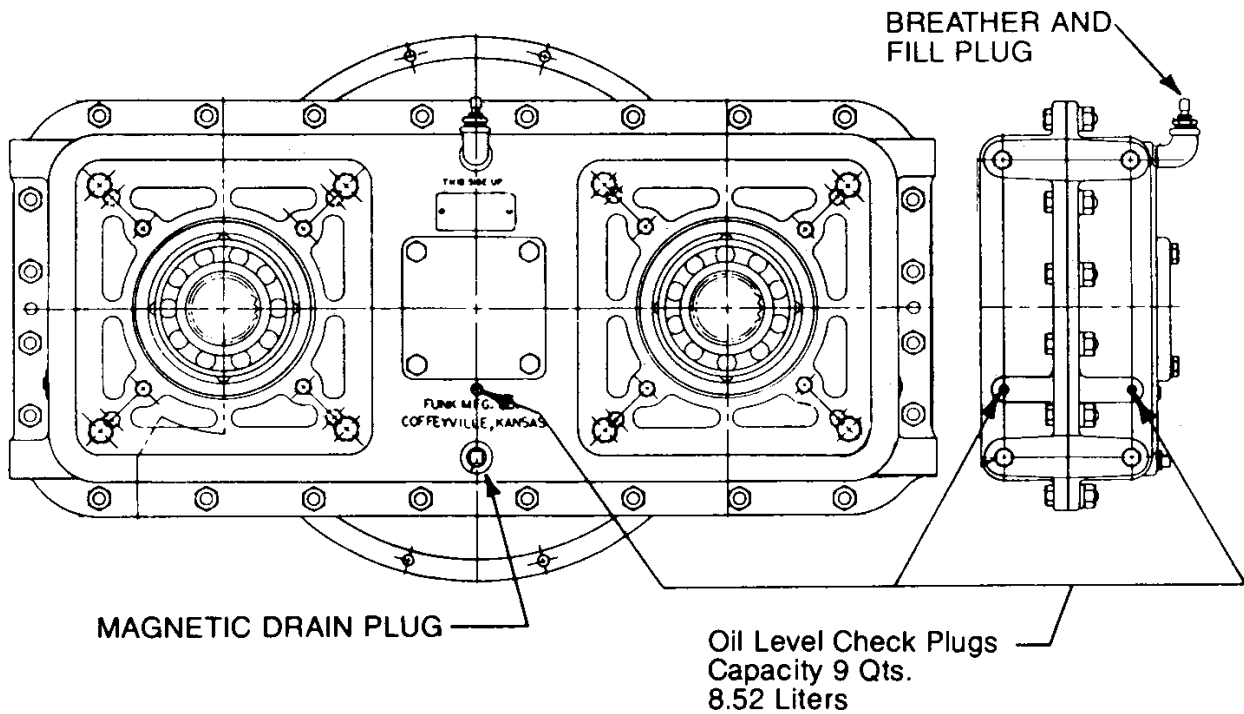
Funk Pump Drive Gearbox (ref. 414347)
